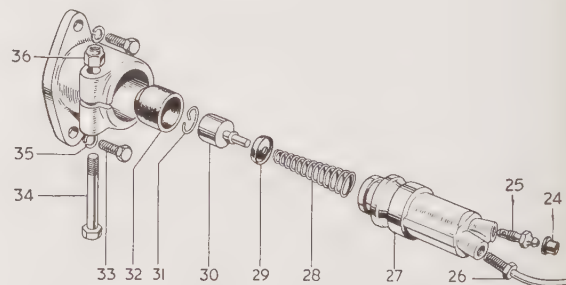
8 Components of operating (slave) cylinder with pinch-bolt clamp.
